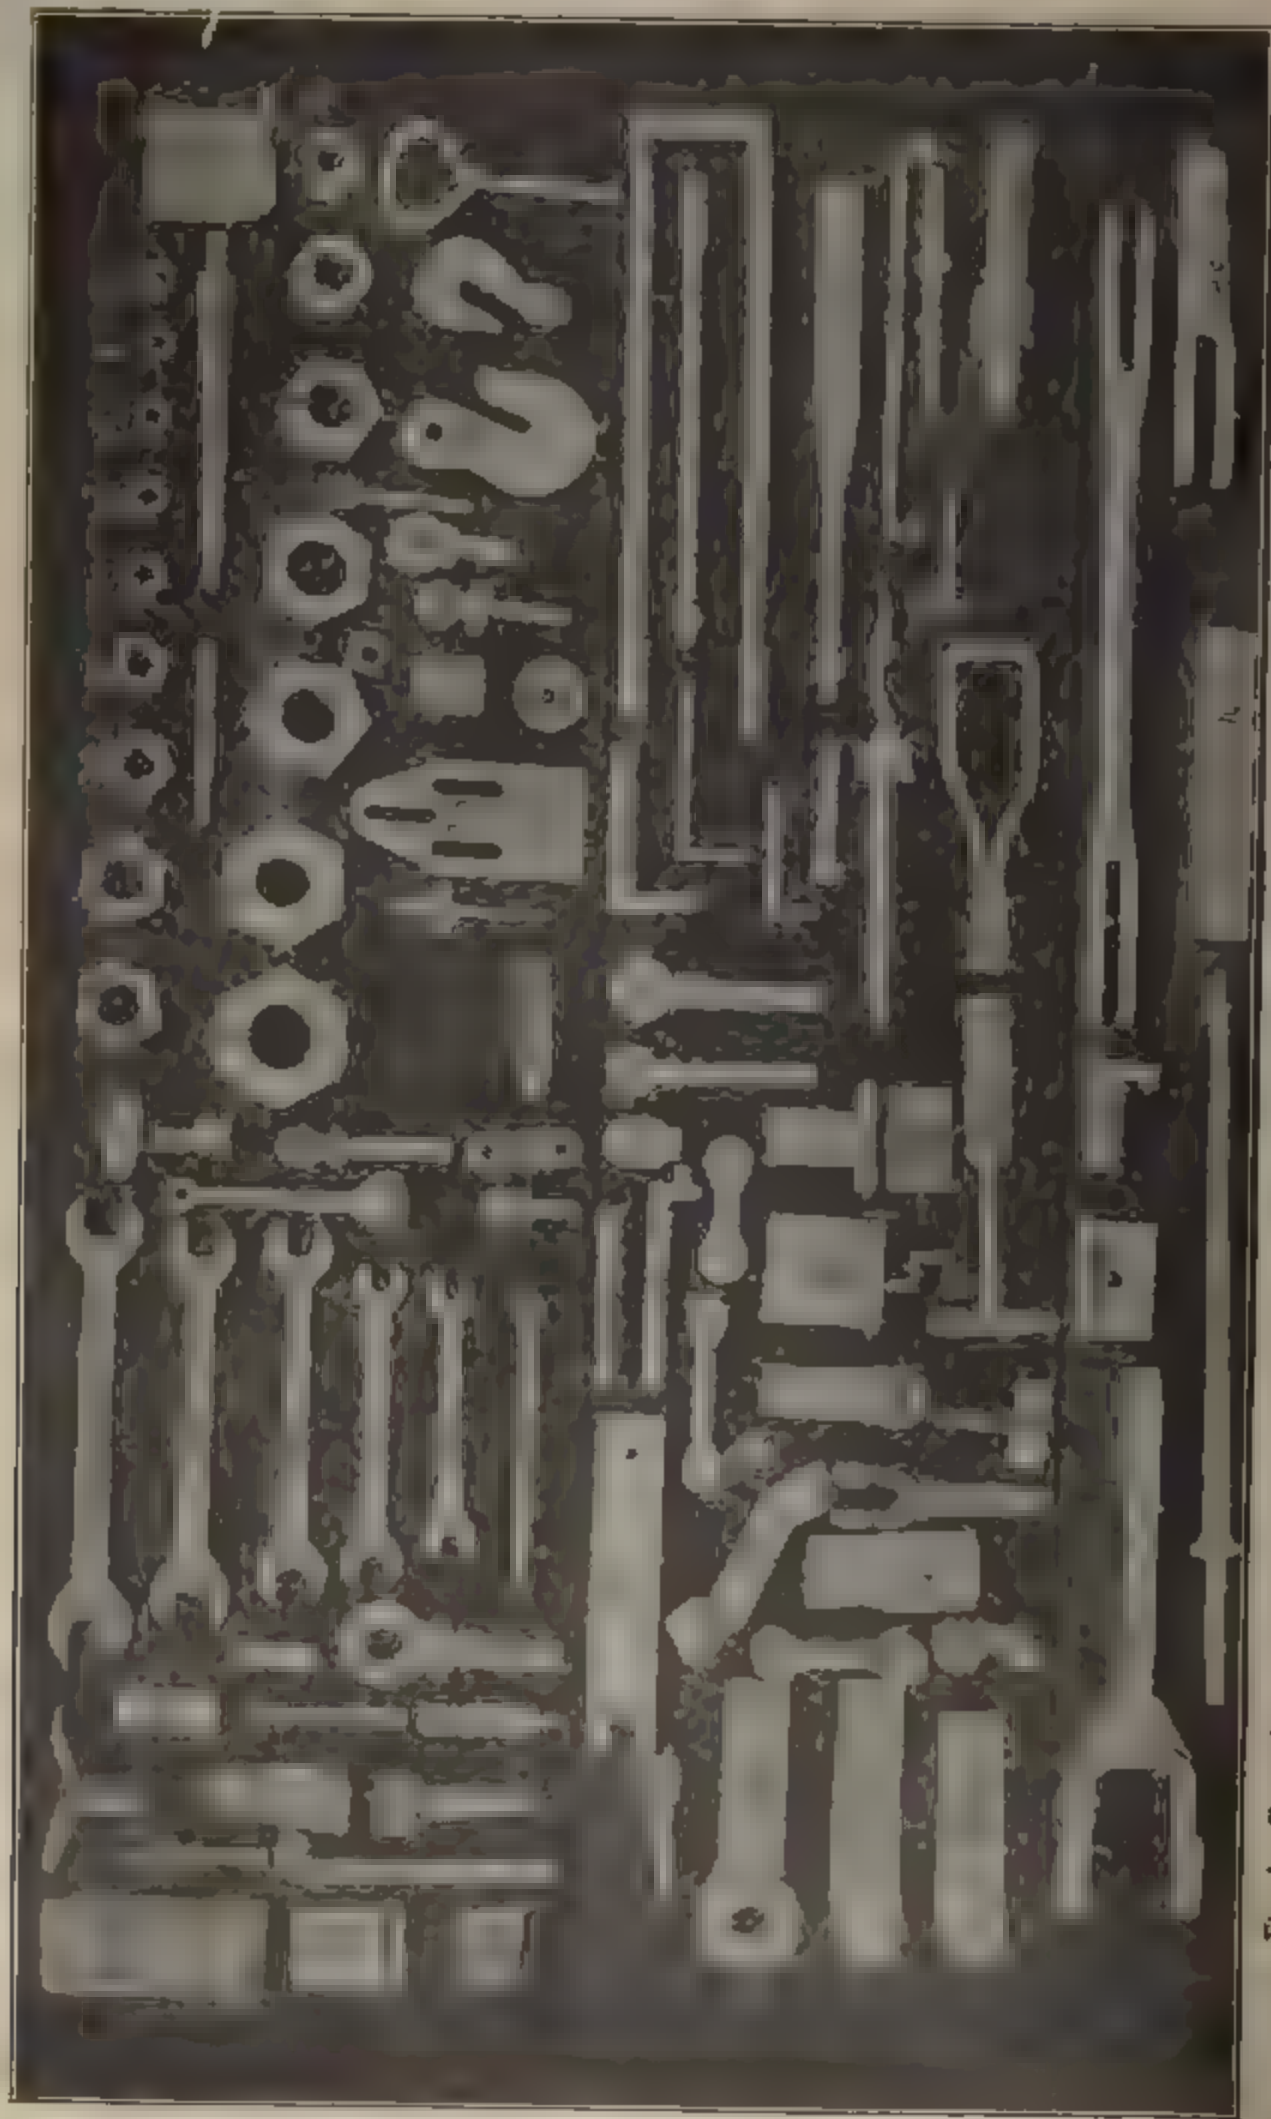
Examples of Forged Parts produced in the Cal. Inwood Shops of the L. S. & M. S. Railway on Ajax Forging Machines
